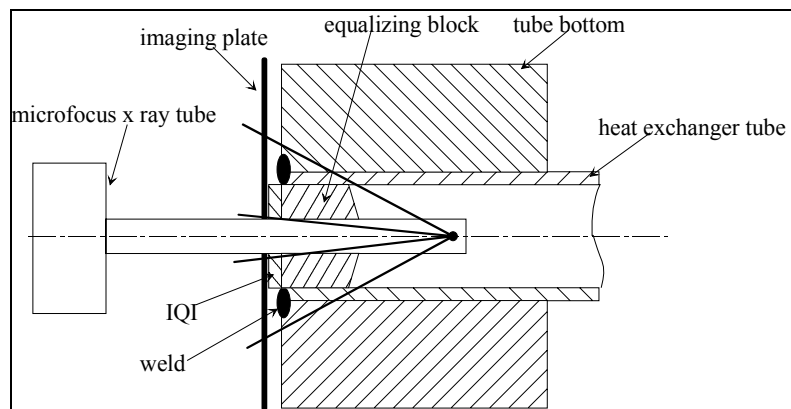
Principle for the inspection of tube to bottom welds in heat exchanger bottoms
